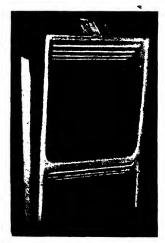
Aluminium Alloy (NA.226) Gravity Diecasting before Test
